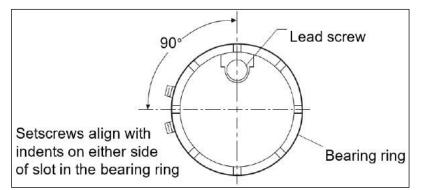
LEAD SCREW (TOP) AND BEARING RING (RIGHT)
